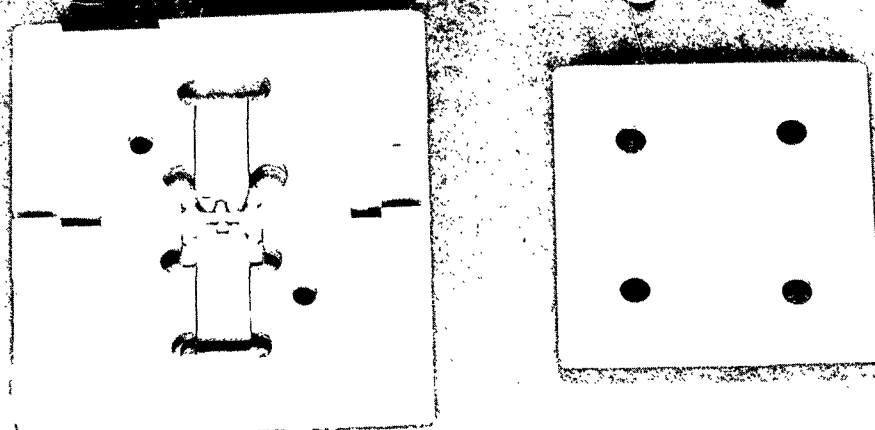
TEB Assembly Jig Showing Parts For One-Junction Device Loaded Into Position in Jig
